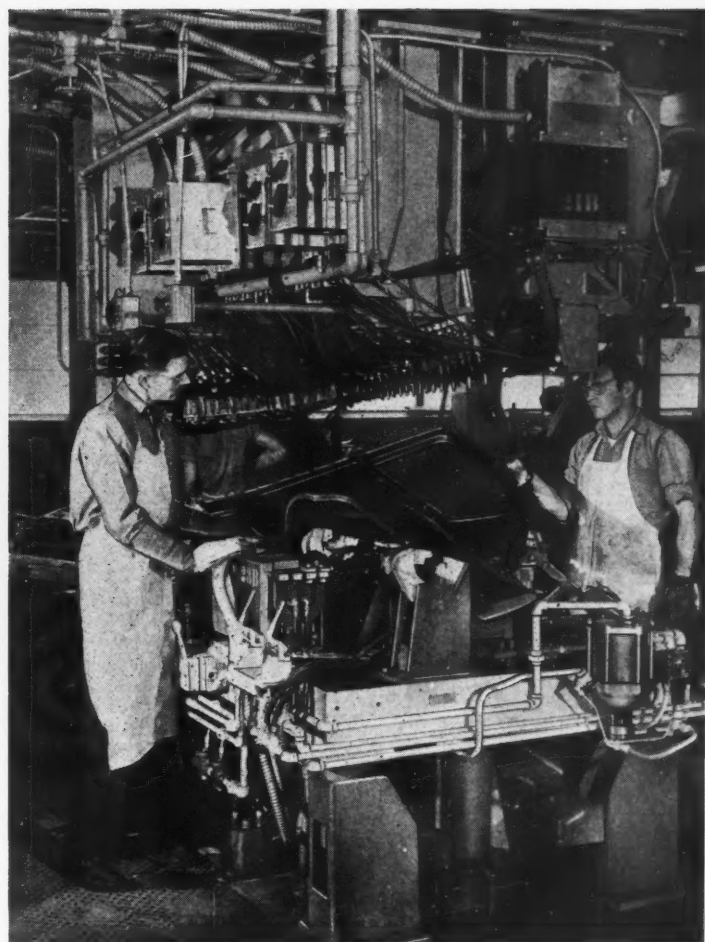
When all underbody parts have been spot-welded to the pans, and the front and rear floor pans joined together, the assembly is unloaded
